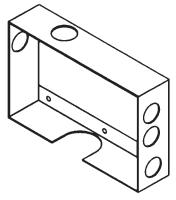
Model MB-P2 - Control Head Mounting Bracket.
